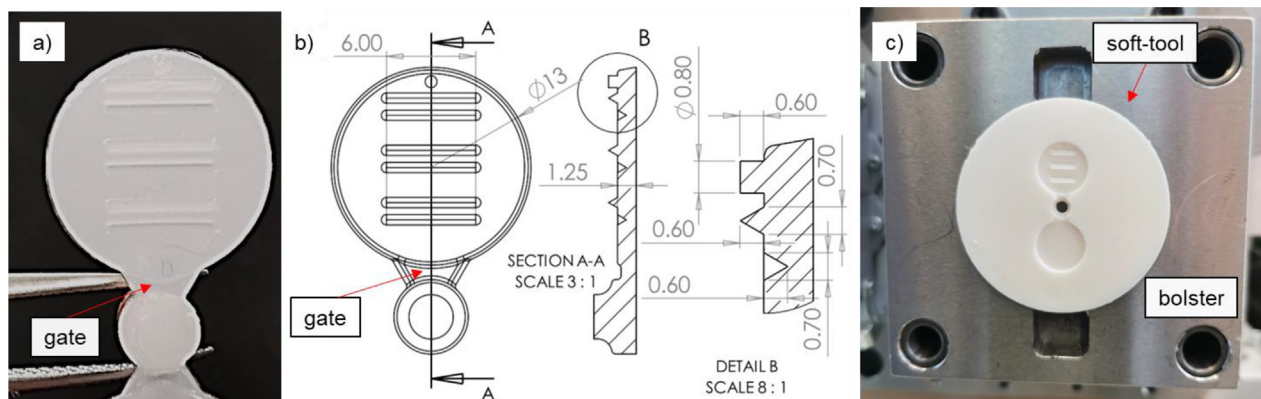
Details of the test object design: a) an optical image showing the test object; b) dimensional details of the test object (dimensions in mm); c) soft-tool placed on the bolster mould.
